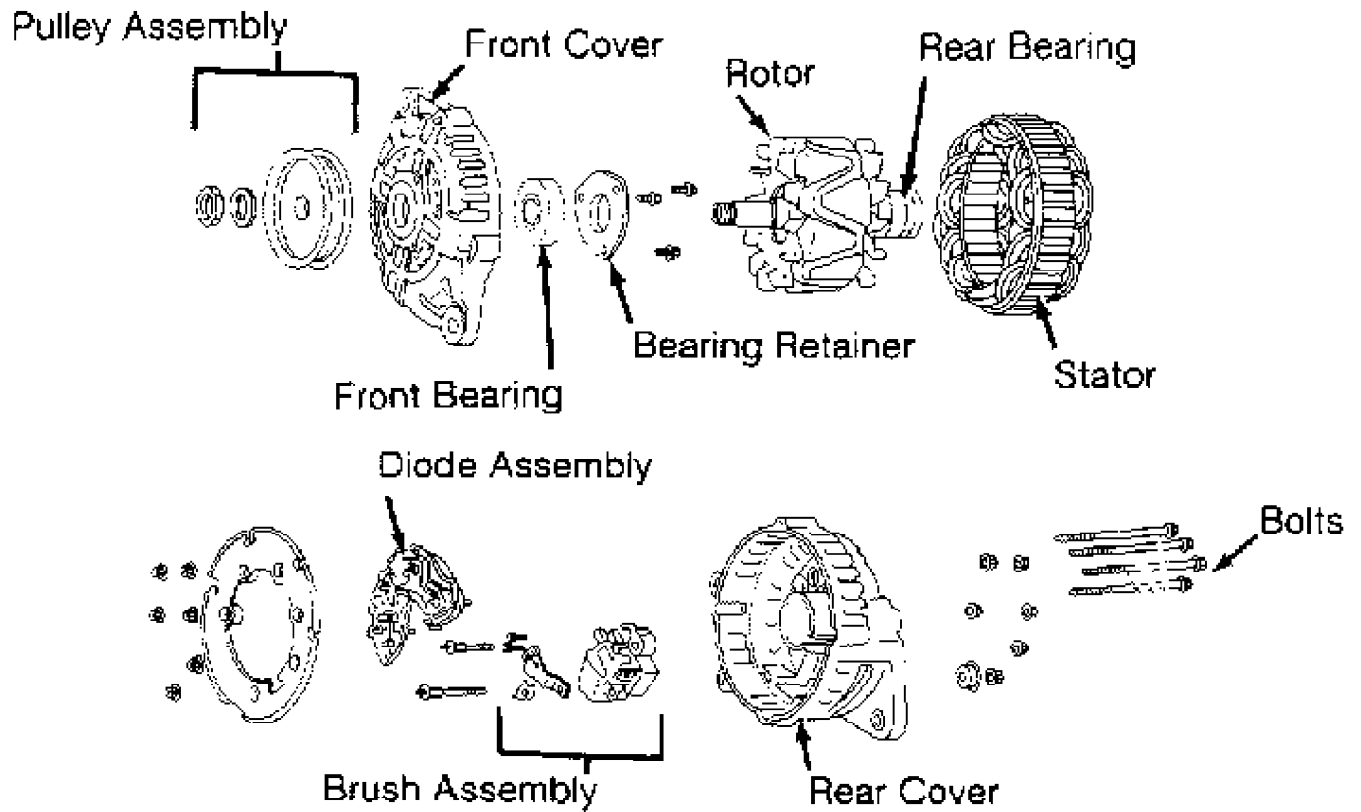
Exploded View Of Alternator (M30 Is Shown; Q45 Is Similar - Hitachi)
